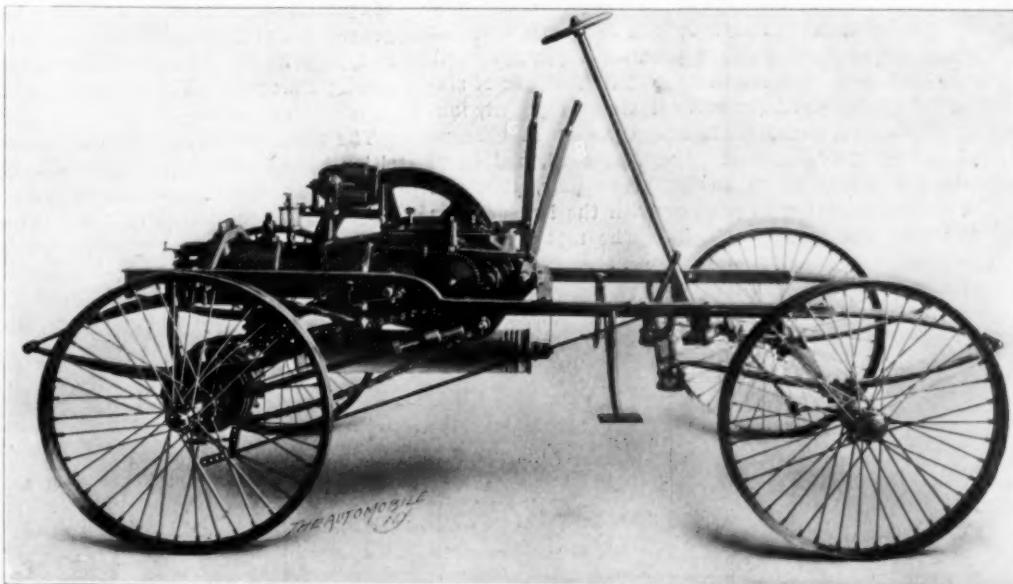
SIDE ELEVATION OF MACHINERY AND GEAR.
